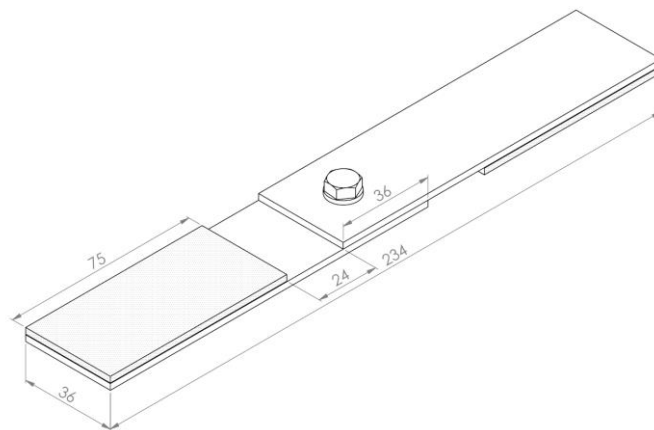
ASTM D5961 specimens' geometry and main dimensions
